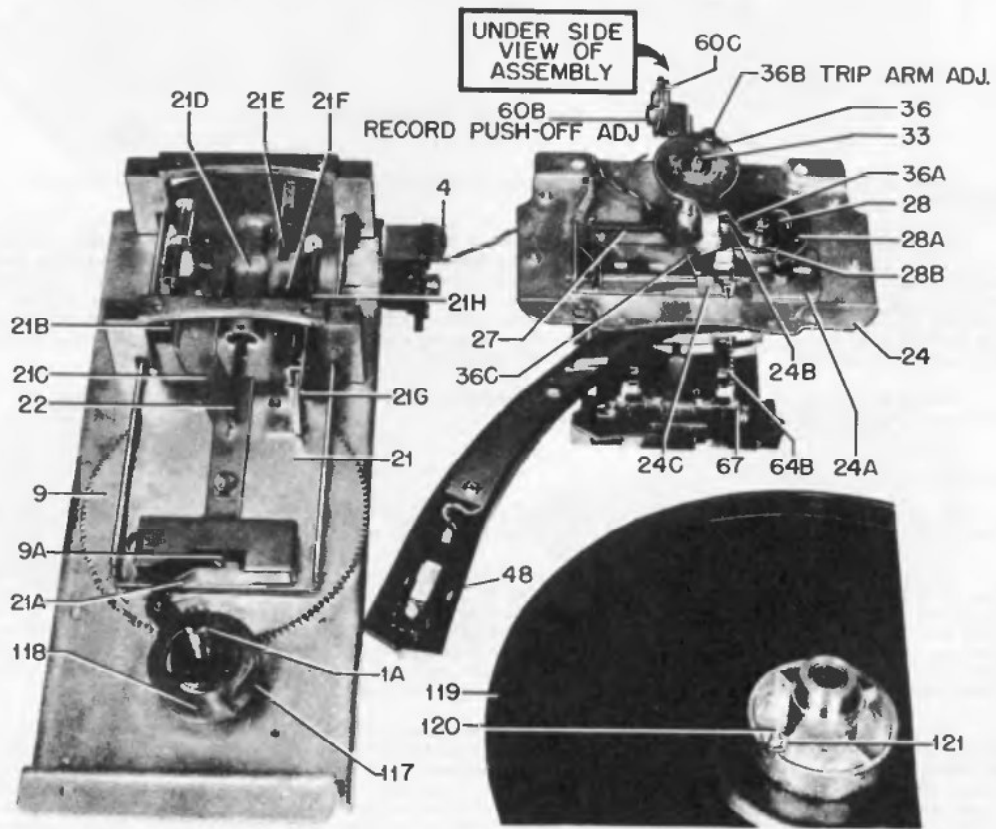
DISASSEMBLED VIEW OF RECORD CHANGER MECHANISM
